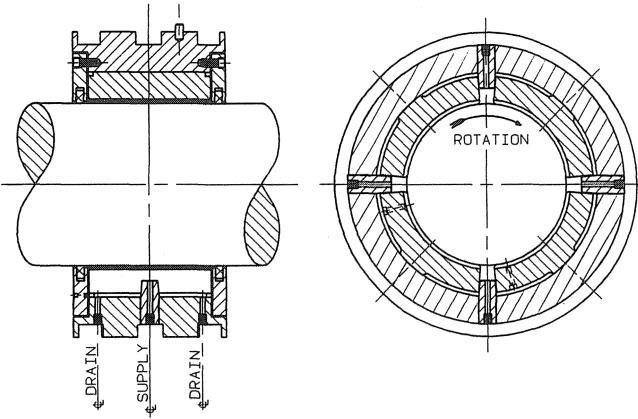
Conventional Style Flooded Tilting Pad Journal Bearing.
